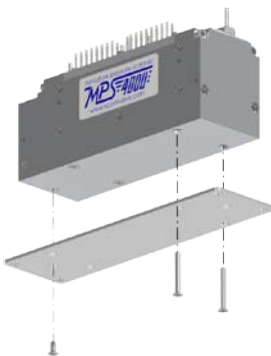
MPS4264 MOUNTING PLATE, BOTTOM
